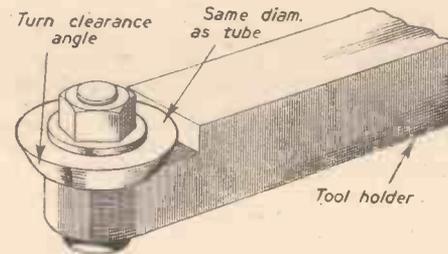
A tool holder which a lathe user can make for turning profiles similar to that needed for the machining of these grooves in the rolls.
